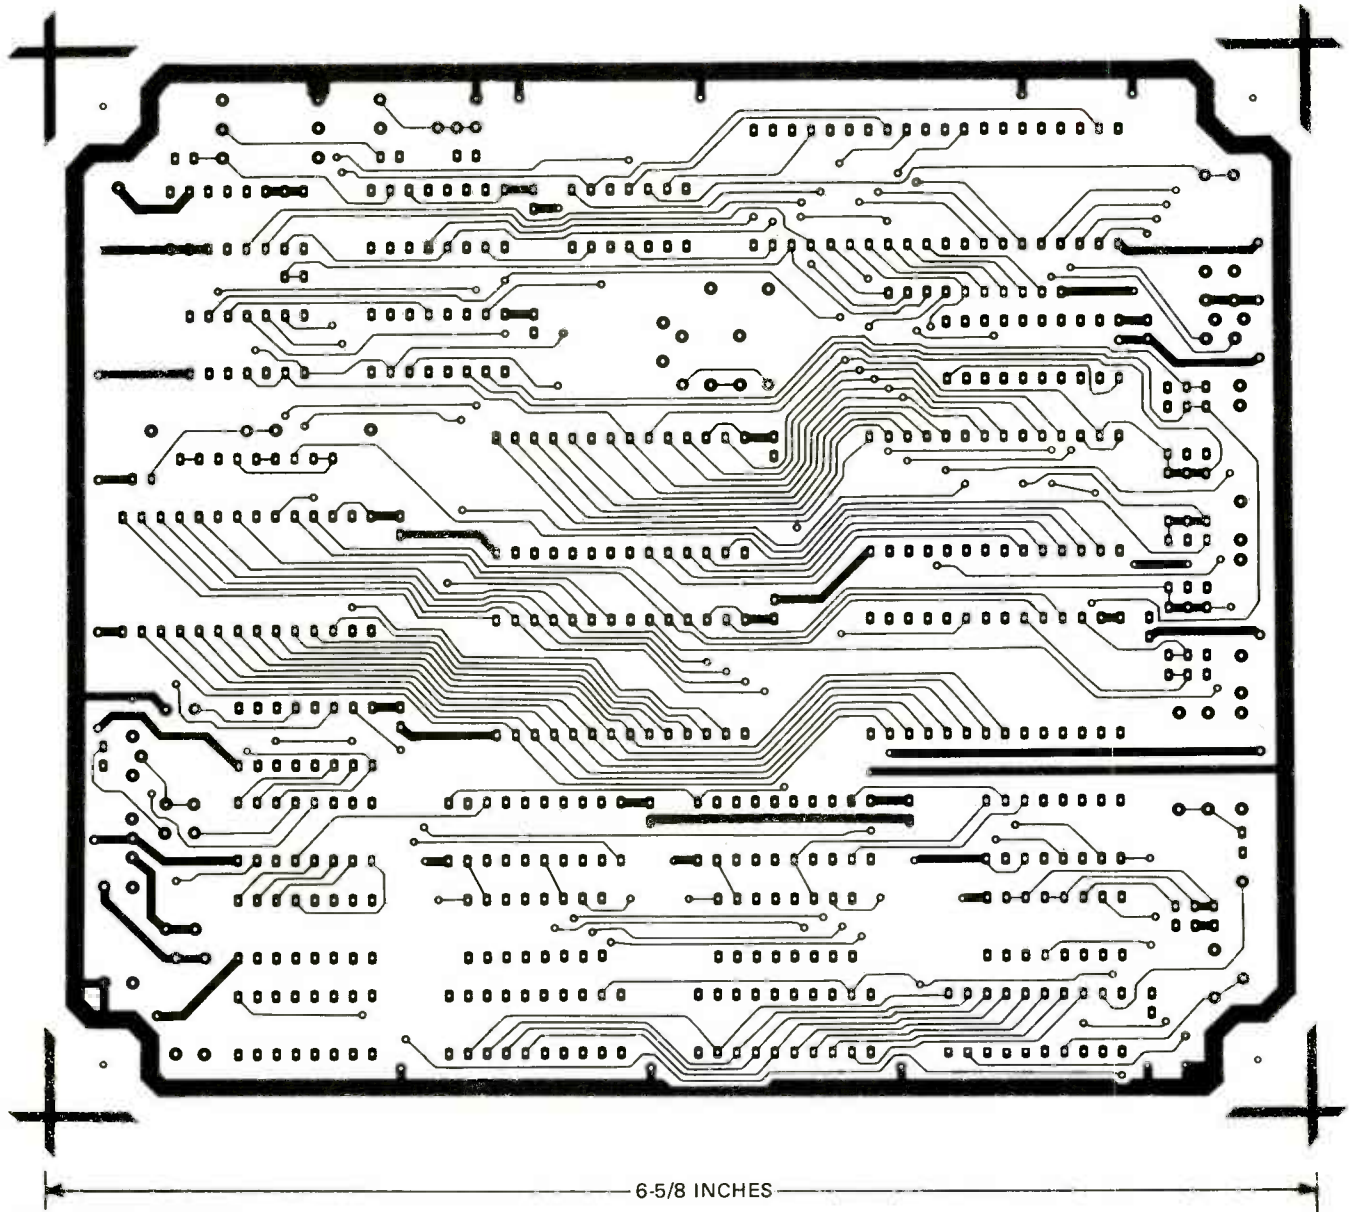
THE SOLDER SIDE of the computer printed-circuit board.
